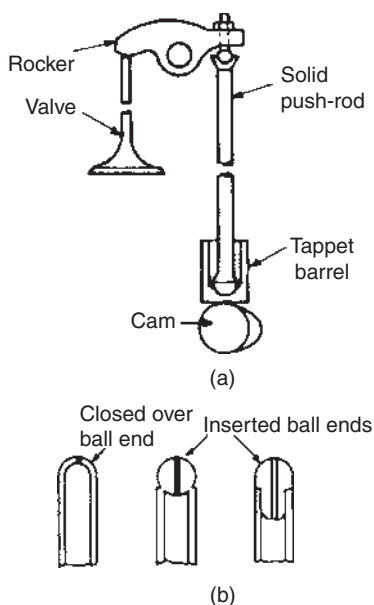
(a) Push-rod valve operation (b) types of pushrod
